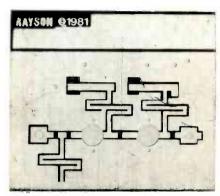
BARE PC BOARD shows where holes for "F" connectors, transistors and disc capacitors are drilled.
